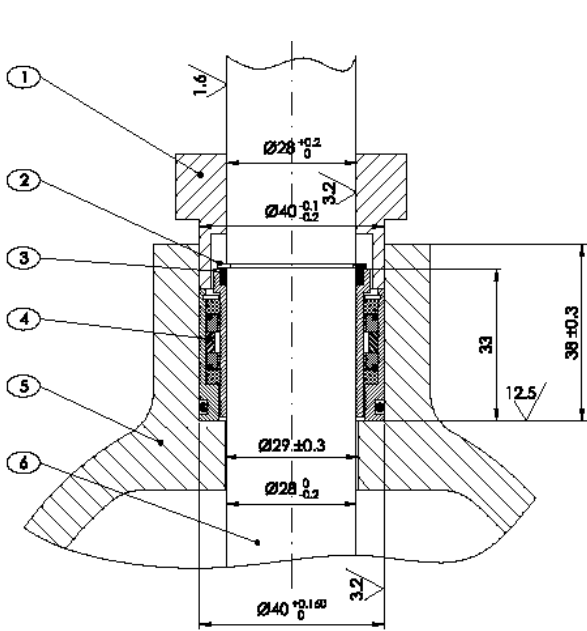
Sketch of needle valve equipped by MF seal; Components: 1 – Gland; 2 – Elastomeric ring; 3 – Push ring; 4 – Magnetic fluid seal; 5 – Bonnet; 6 – Steam;
